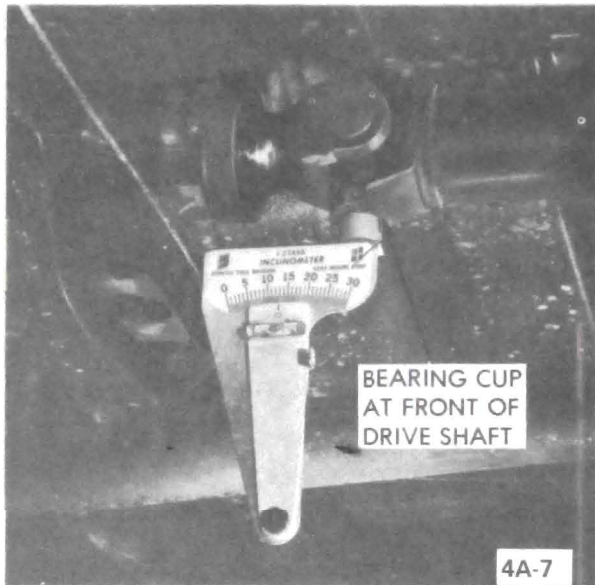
A-7 Measuring Angle at Front of Propeller Shaft
